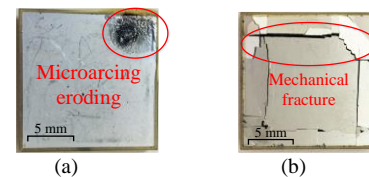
Typical failures of PP IGBT chips. (a) Micro-arc eroding. (b) Mechanical fracture.
